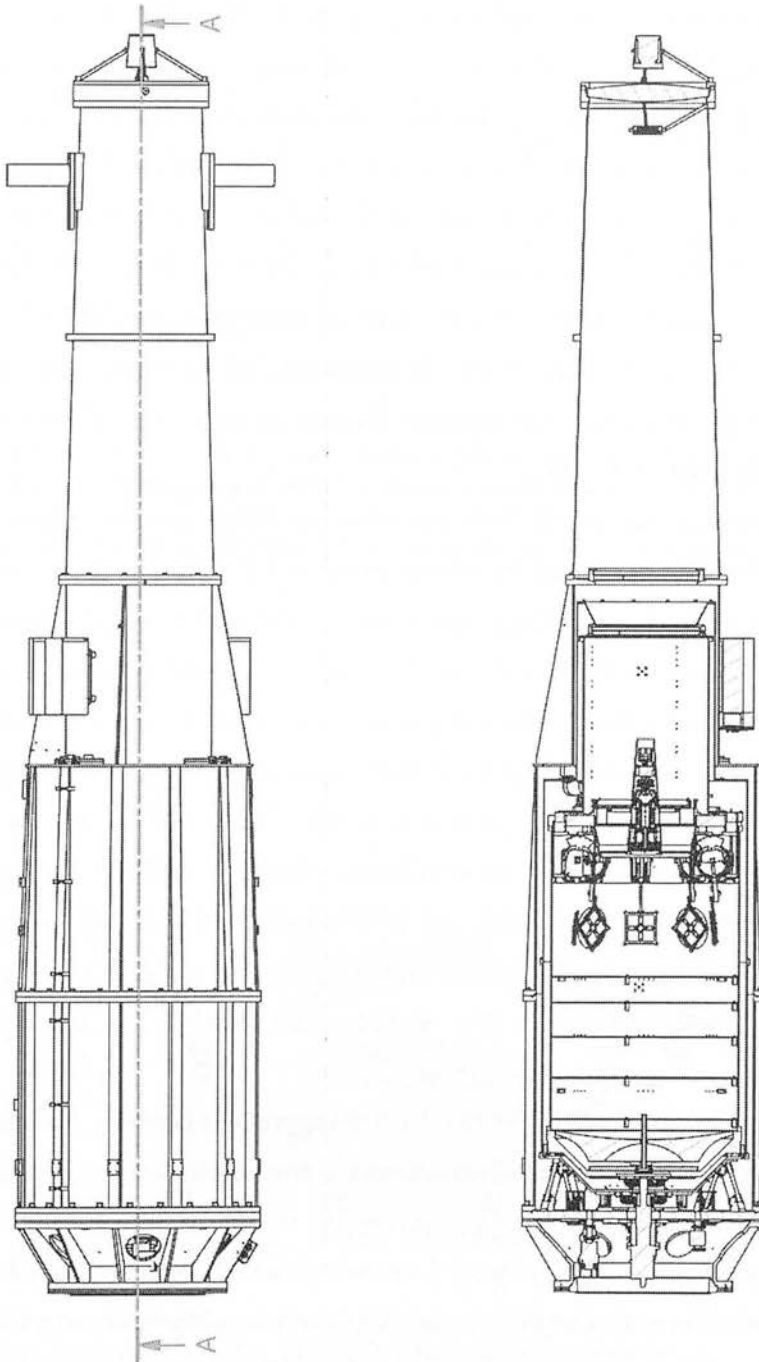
Mechanical CAD drawing of the complete WFCAM structure. An external view of the cryostat and filed tower on the left and a cross section on the right.
